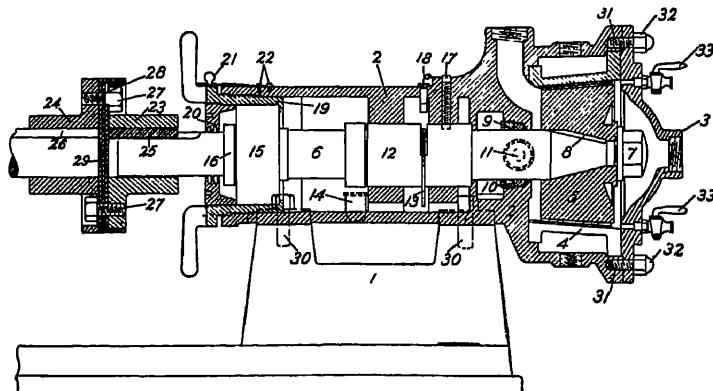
Cross-Section of a Grooved-Surface Type of Colloid Mill.
